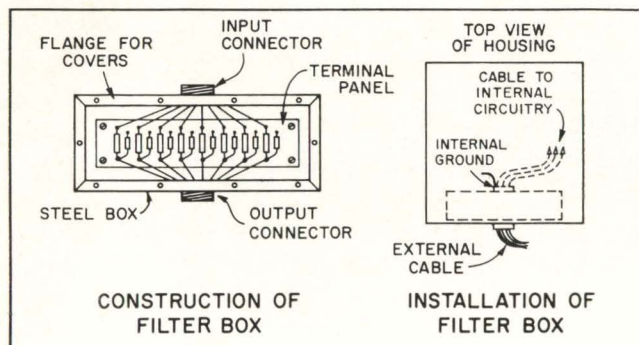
Output filters should be assembled on a terminal panel in a steel box.
